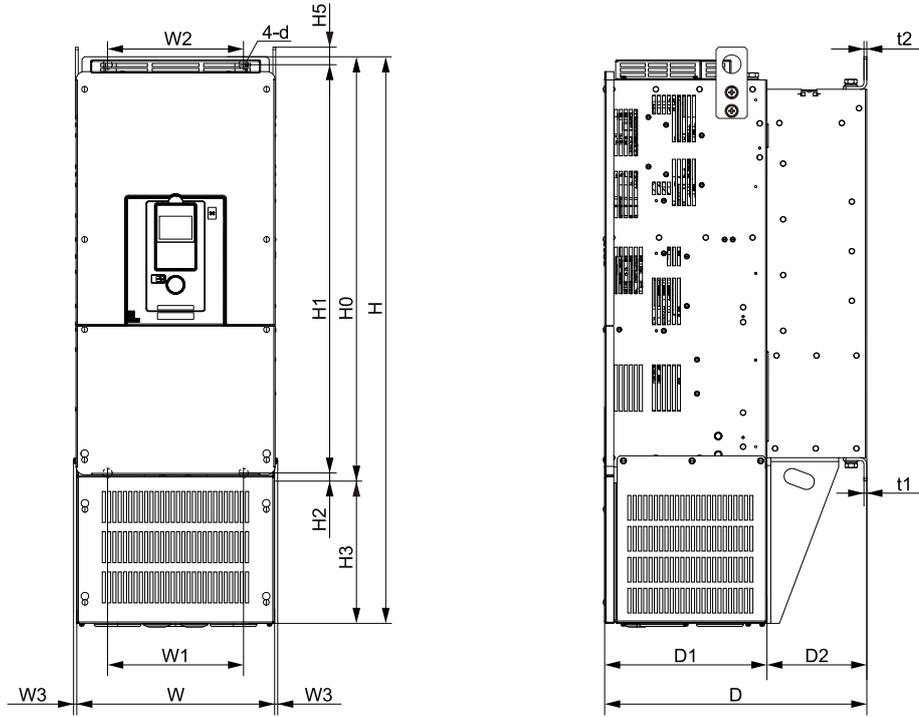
Exterior and Mounting Dimensions Diagram 7
